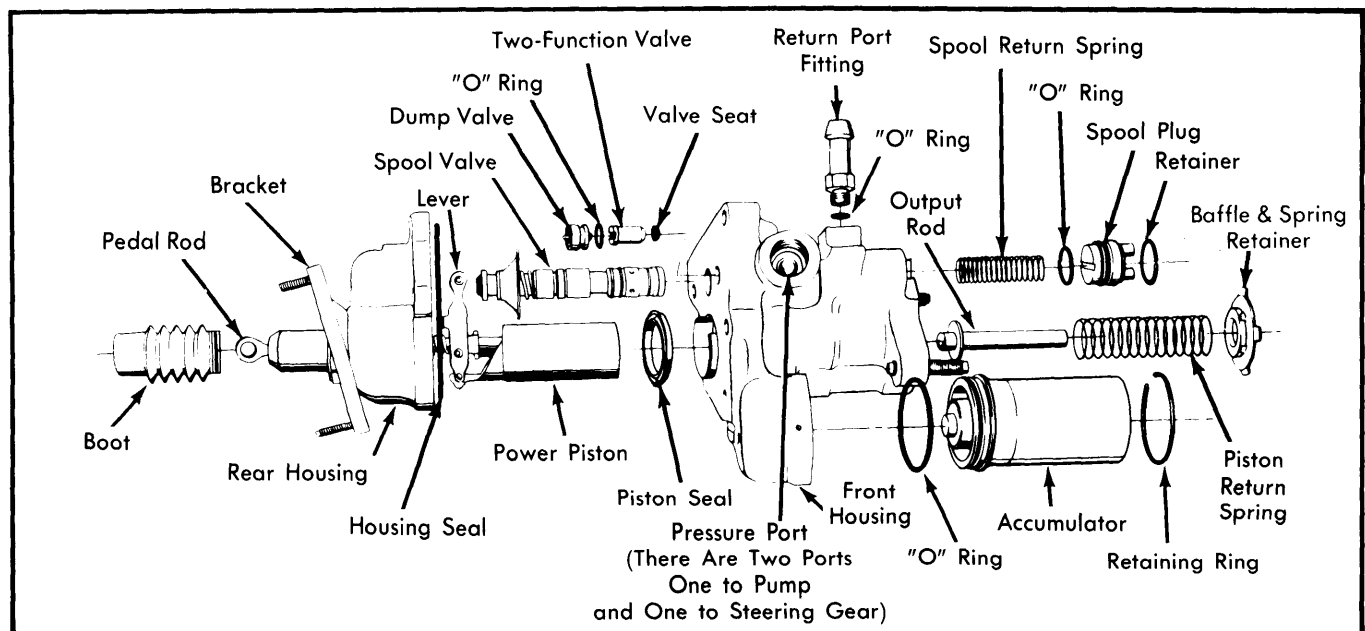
Exploded View of Typical Hydro-Boost Power Brake System (Chevrolet Shown)
